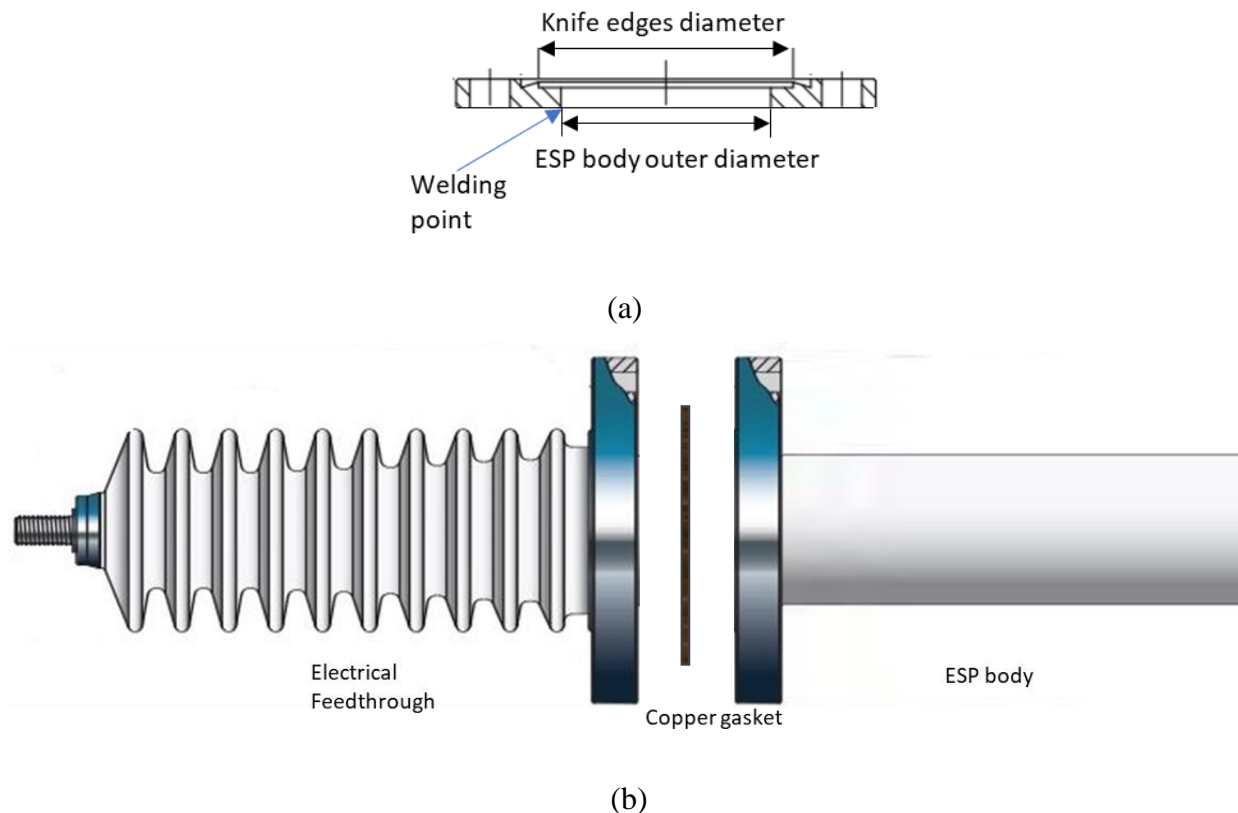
(a) The schematic of the welding point between ESP body and ConFlat flange; (b) the assembly schematic of electrical feedthrough flange, gasket and ESP body.
